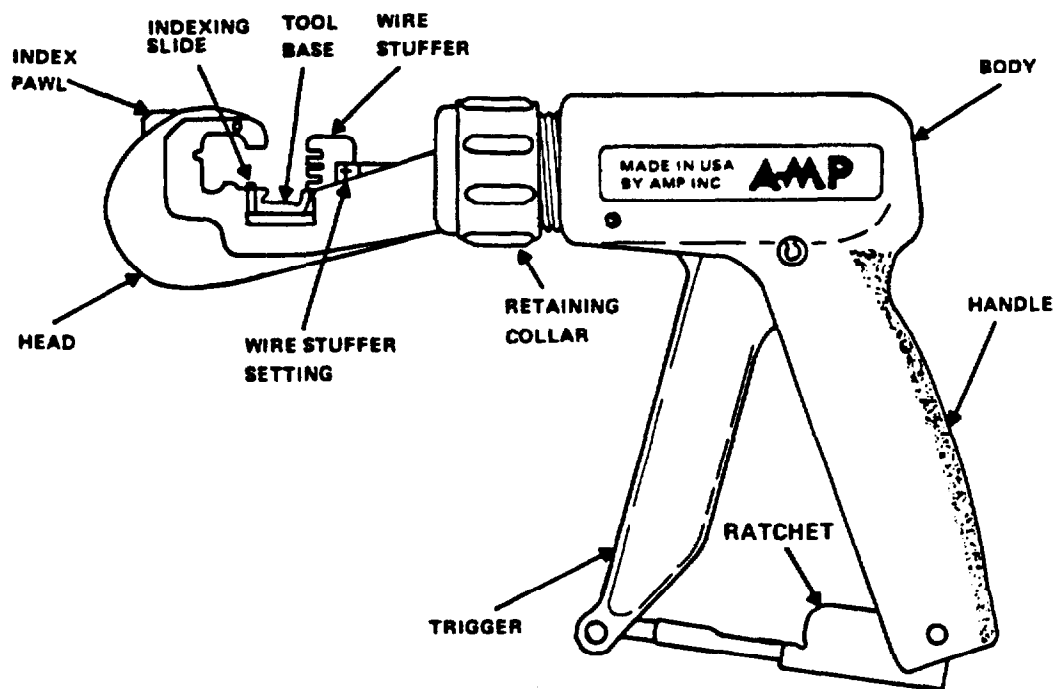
MTA Pistol Grip Tool (8710-1303)
